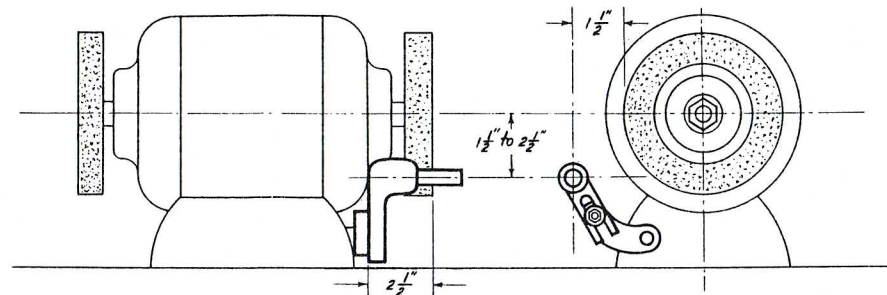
The adapter shaft must be positioned according to dimensions shown above.
